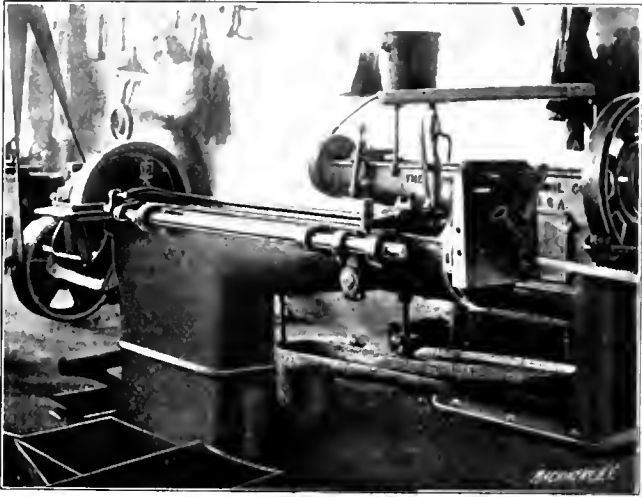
Draw-cut Broaching Machine, showing Single Keyway Broach and a Jig for Holding Front Axle Part.
